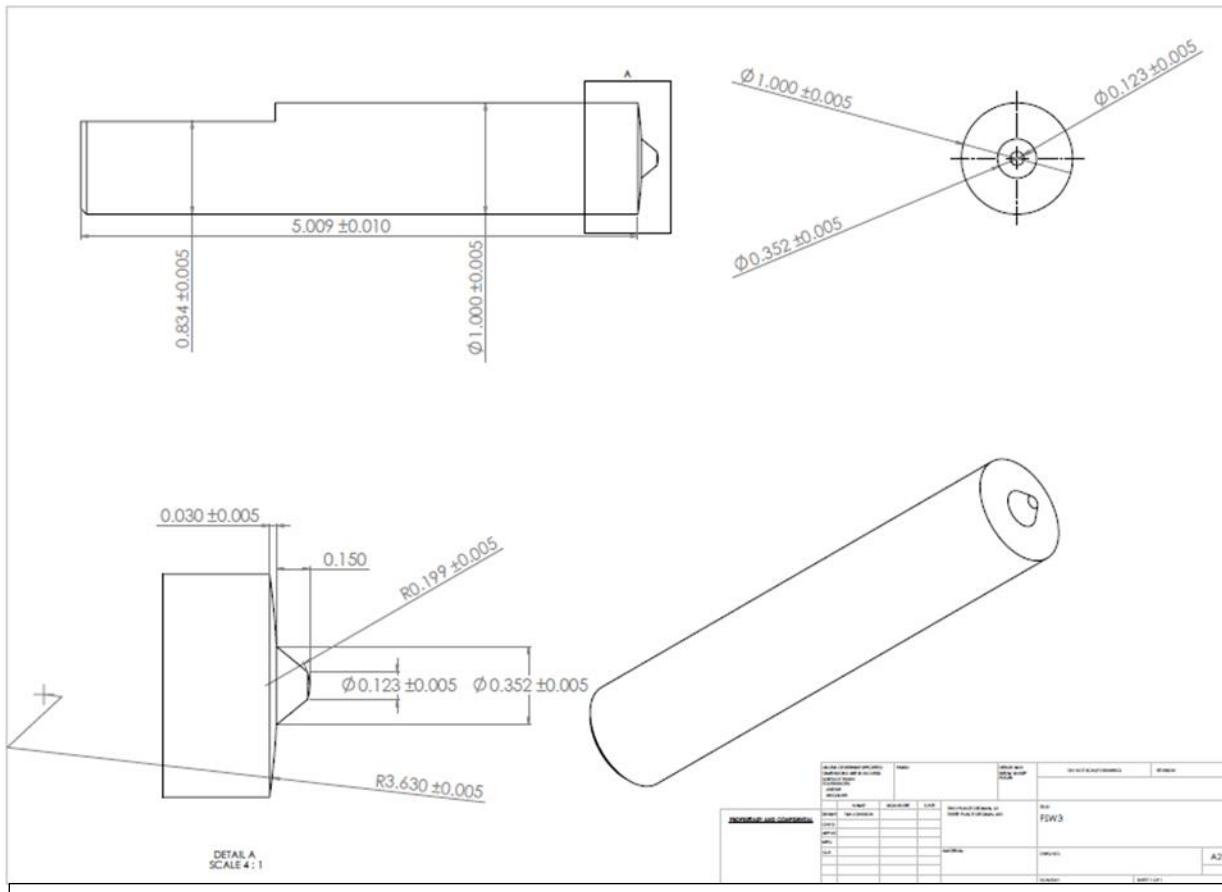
Tungsten-25% Rhenium-4% Hafnium Carbide Pin Tool Technical Drawing. (Photo Courtesy of Todd Curtis)
